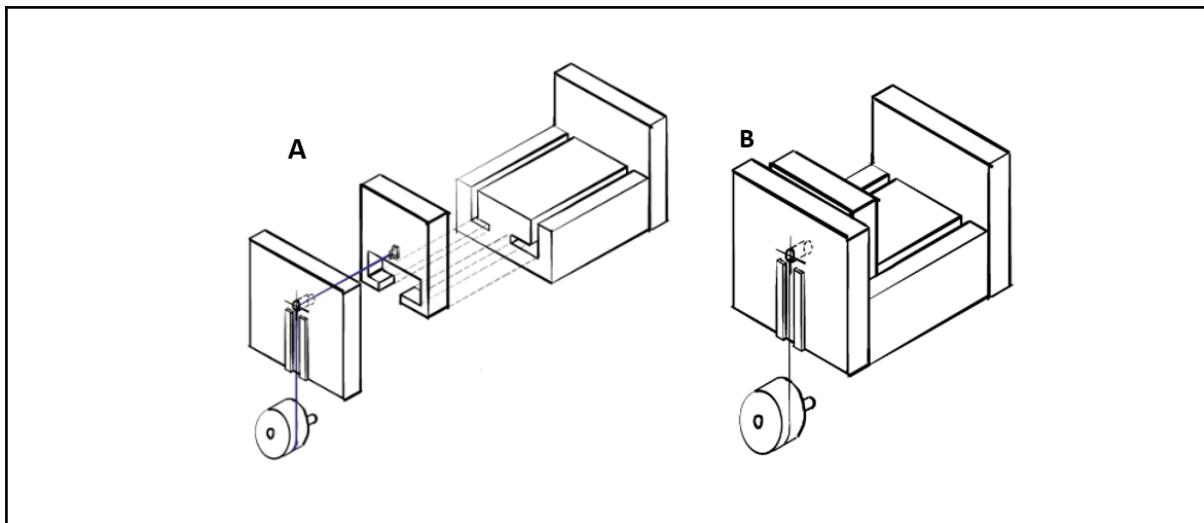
Design sketches of the clamp mechanism; exploded view (A); assembly view (B).
